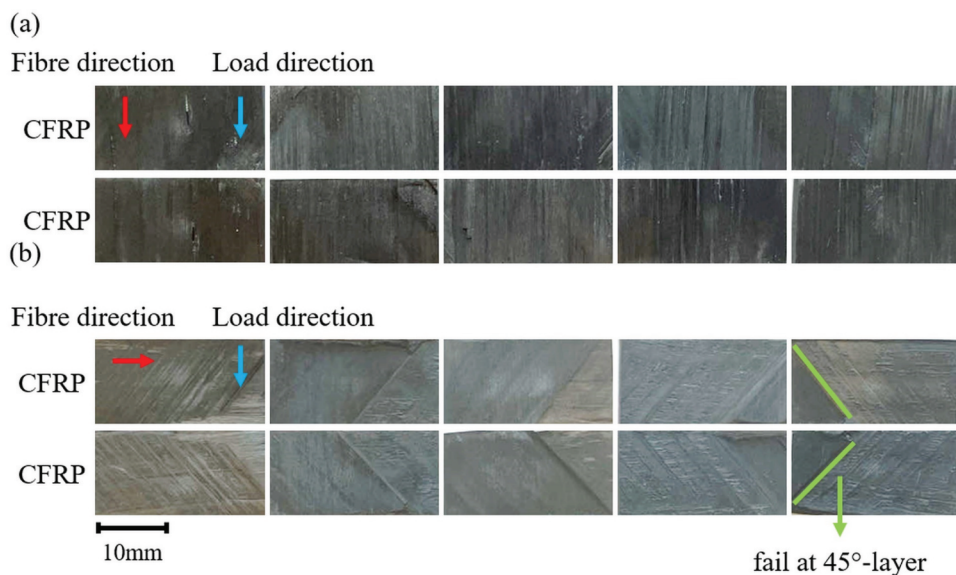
Fracture surfaces of CFRP specimens with multiaxial layer structure, (a) 0°-specimens, (b) 90°-specimens with the illustration of fibre direction of the first prepreg layer and load direction.
